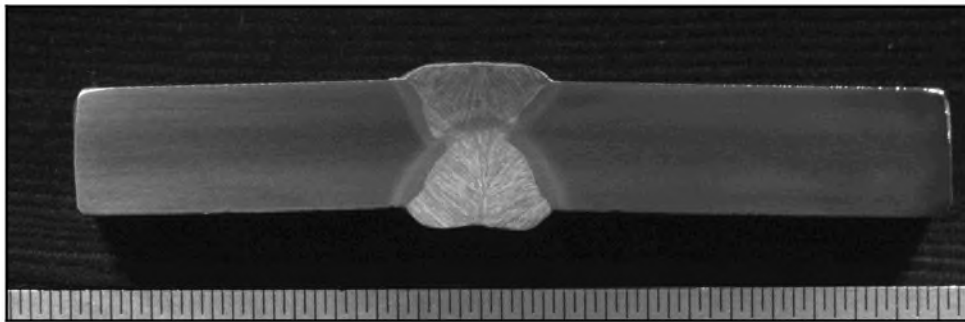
Cross girth weld section taken from the ~159° location on the pipe. The failed joint side is on the left.
